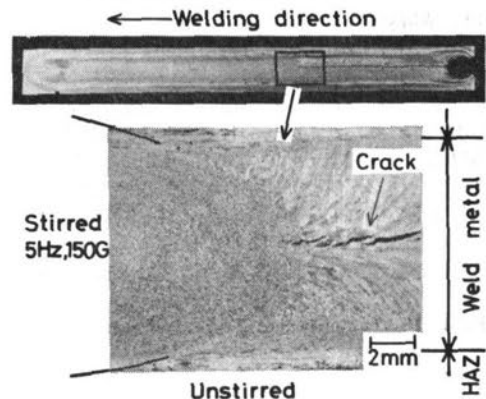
Macrostructural change of weld metal caused by stirring applied on the way of welding
